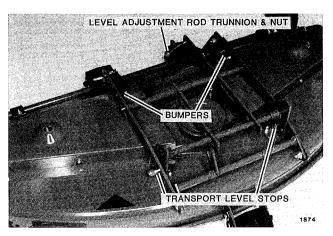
42 in. (107 cm) Side Discharge Mower Adjustments
